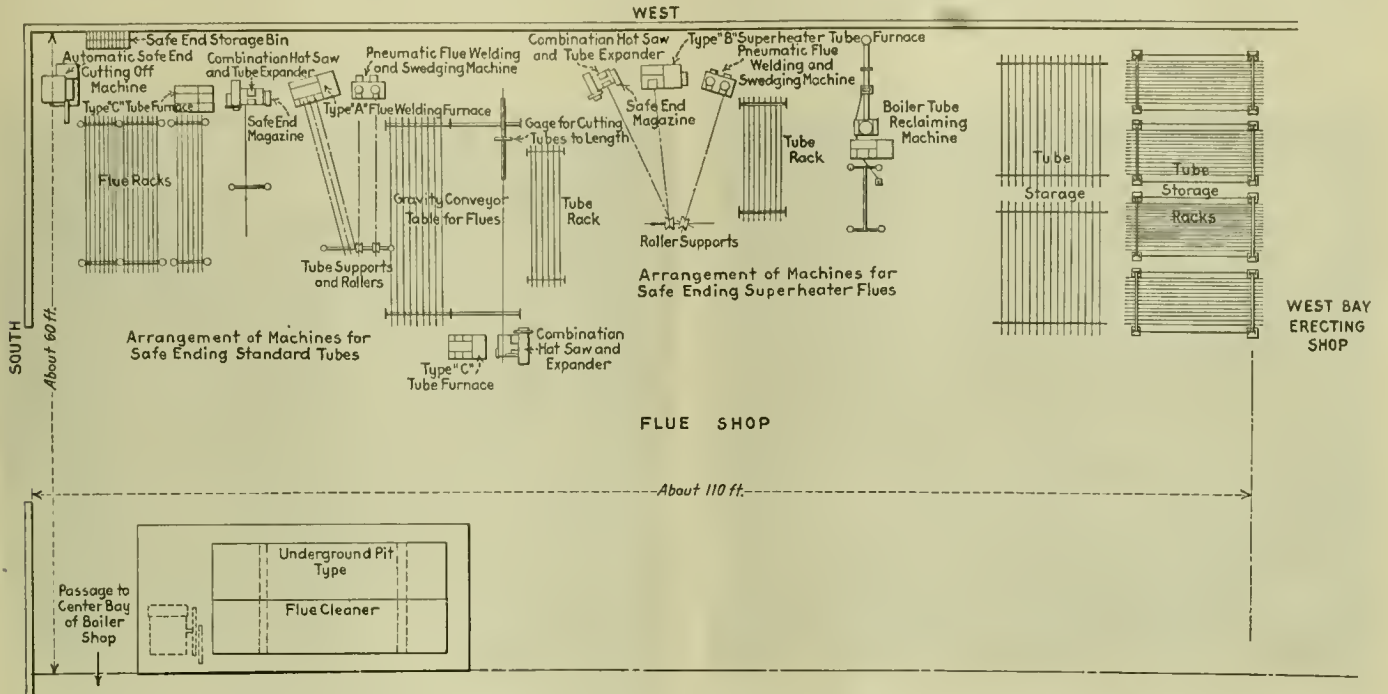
Arrangement of Machinery and Equipment for Safe Ending Locomotive Boiler Tubes and Superheater Flues
